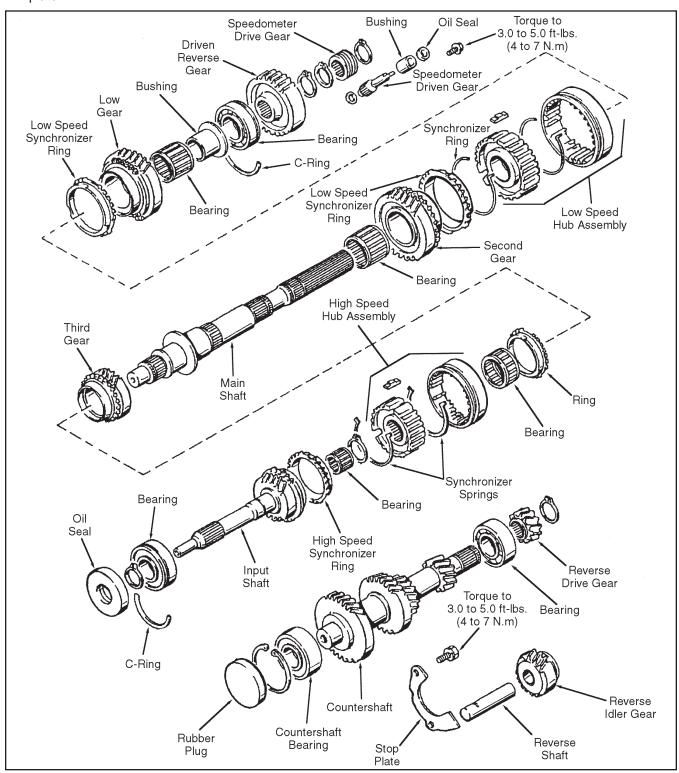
G-25. Countershaft, Main Shaft, Input Shaft and Stop Plate
